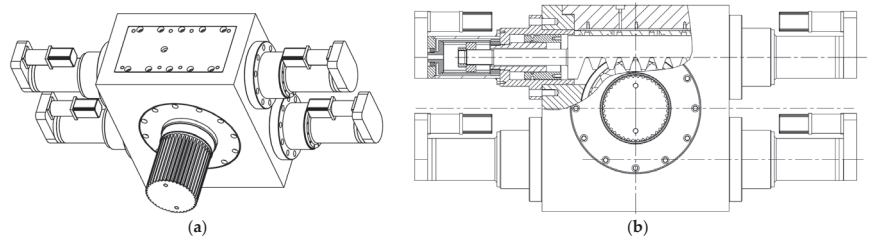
Structure of the gear-rack swing hydraulic cylinder: (a) three-dimensional view and (b) profile.
